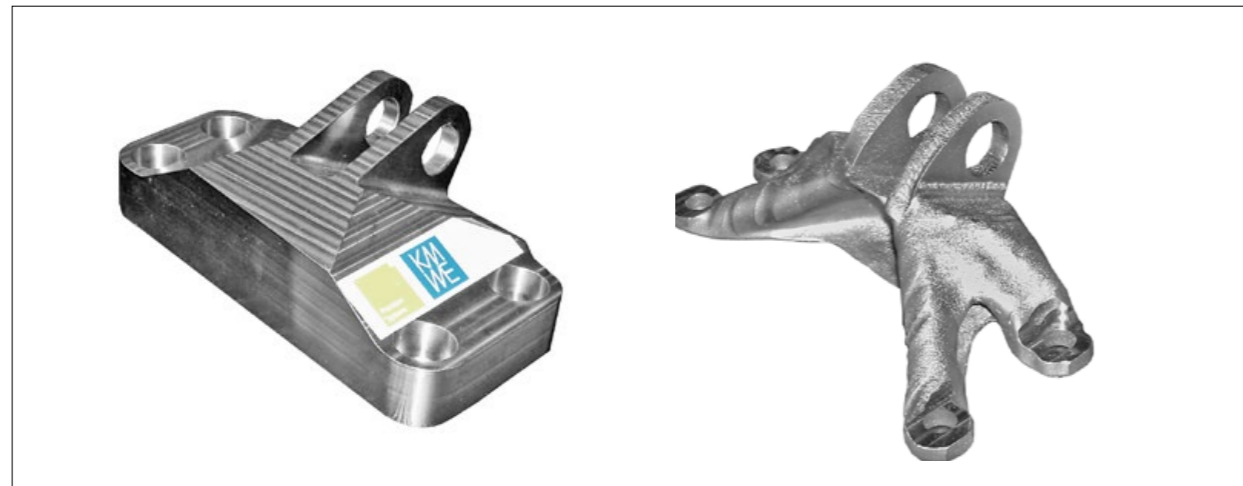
A stainless steel fixture produced as a machined part (left) and optimised for Additive Manufacturing (right)
